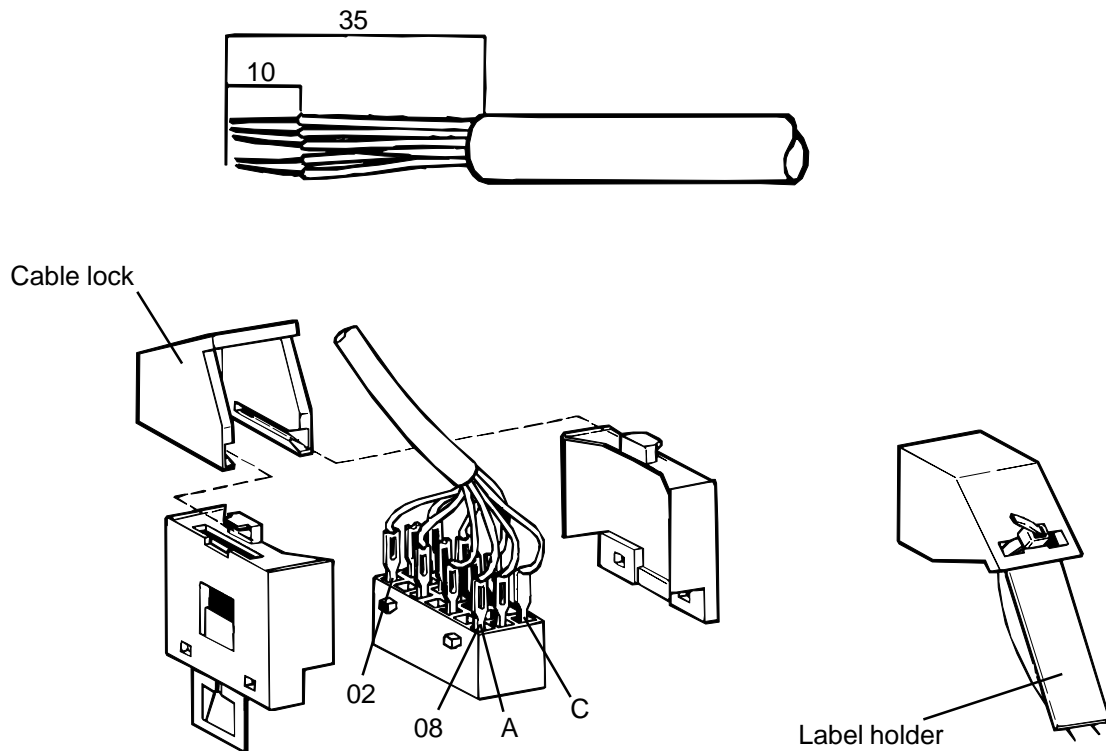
Stripping of the cable and the wires and assembling of the BYB multipin connector.
